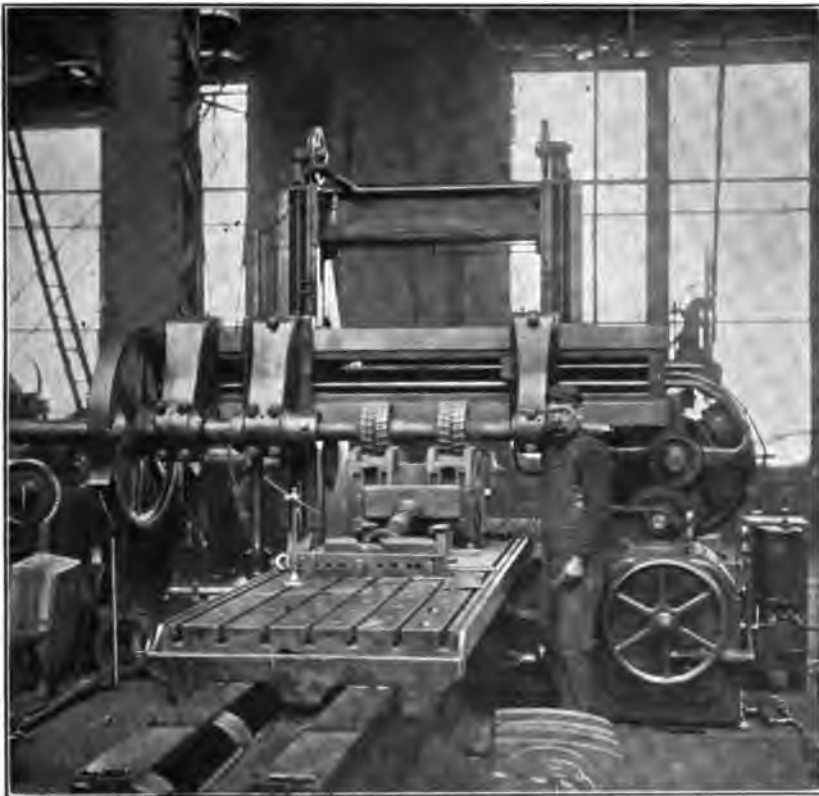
The new tools have given a strong impetus to the use of the milling machine in places where previously the planer or shaper was considered necessary.
